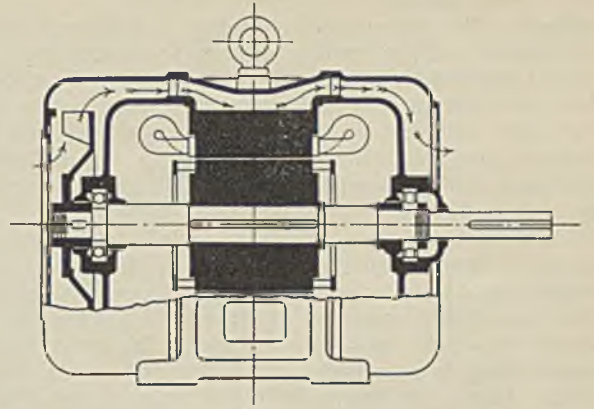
Sectional Drawing of Fan-cooled Totally-Enclosed Motor.
